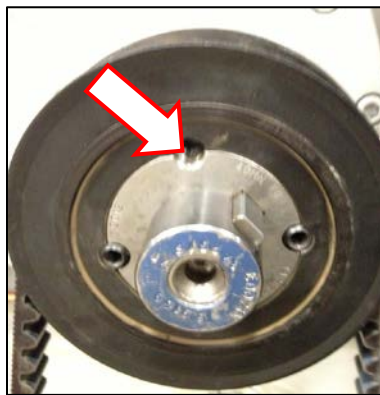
EXPANDER PULLEY REMOVAL
